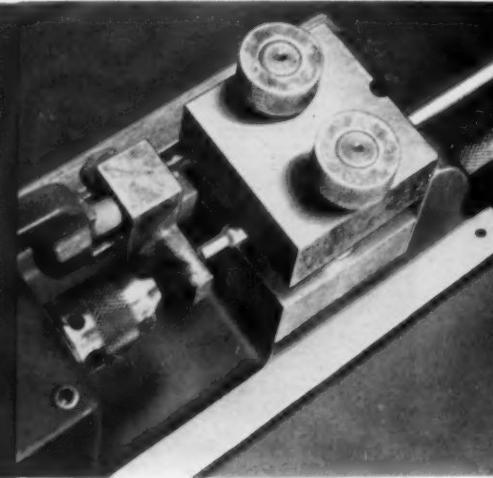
The machine shown herewith utilizes an air-operated ram and clamp for the purpose of performing tube reduction operations.
